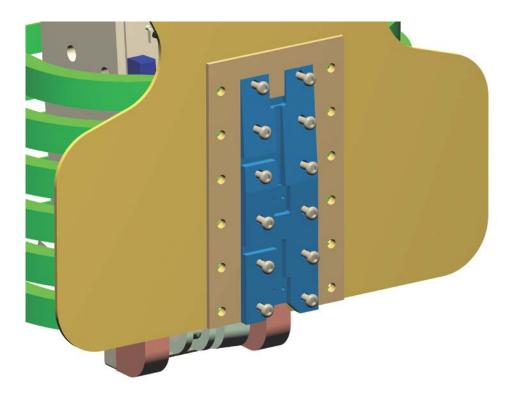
Removing the BHCS screws holding the slider assembly to the bib
